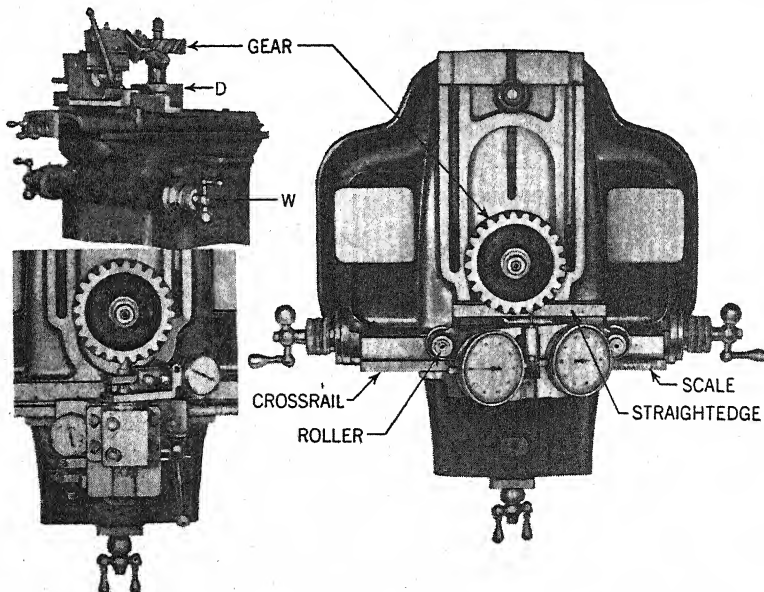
The Lees-Bradner Gear Tester Employing a Base Circle Disk and Straightedge.
